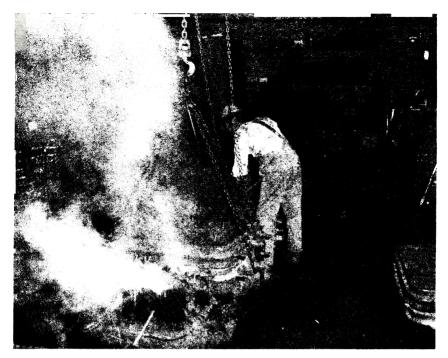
Shakeout of casting from floor mold using a chain hoist.
